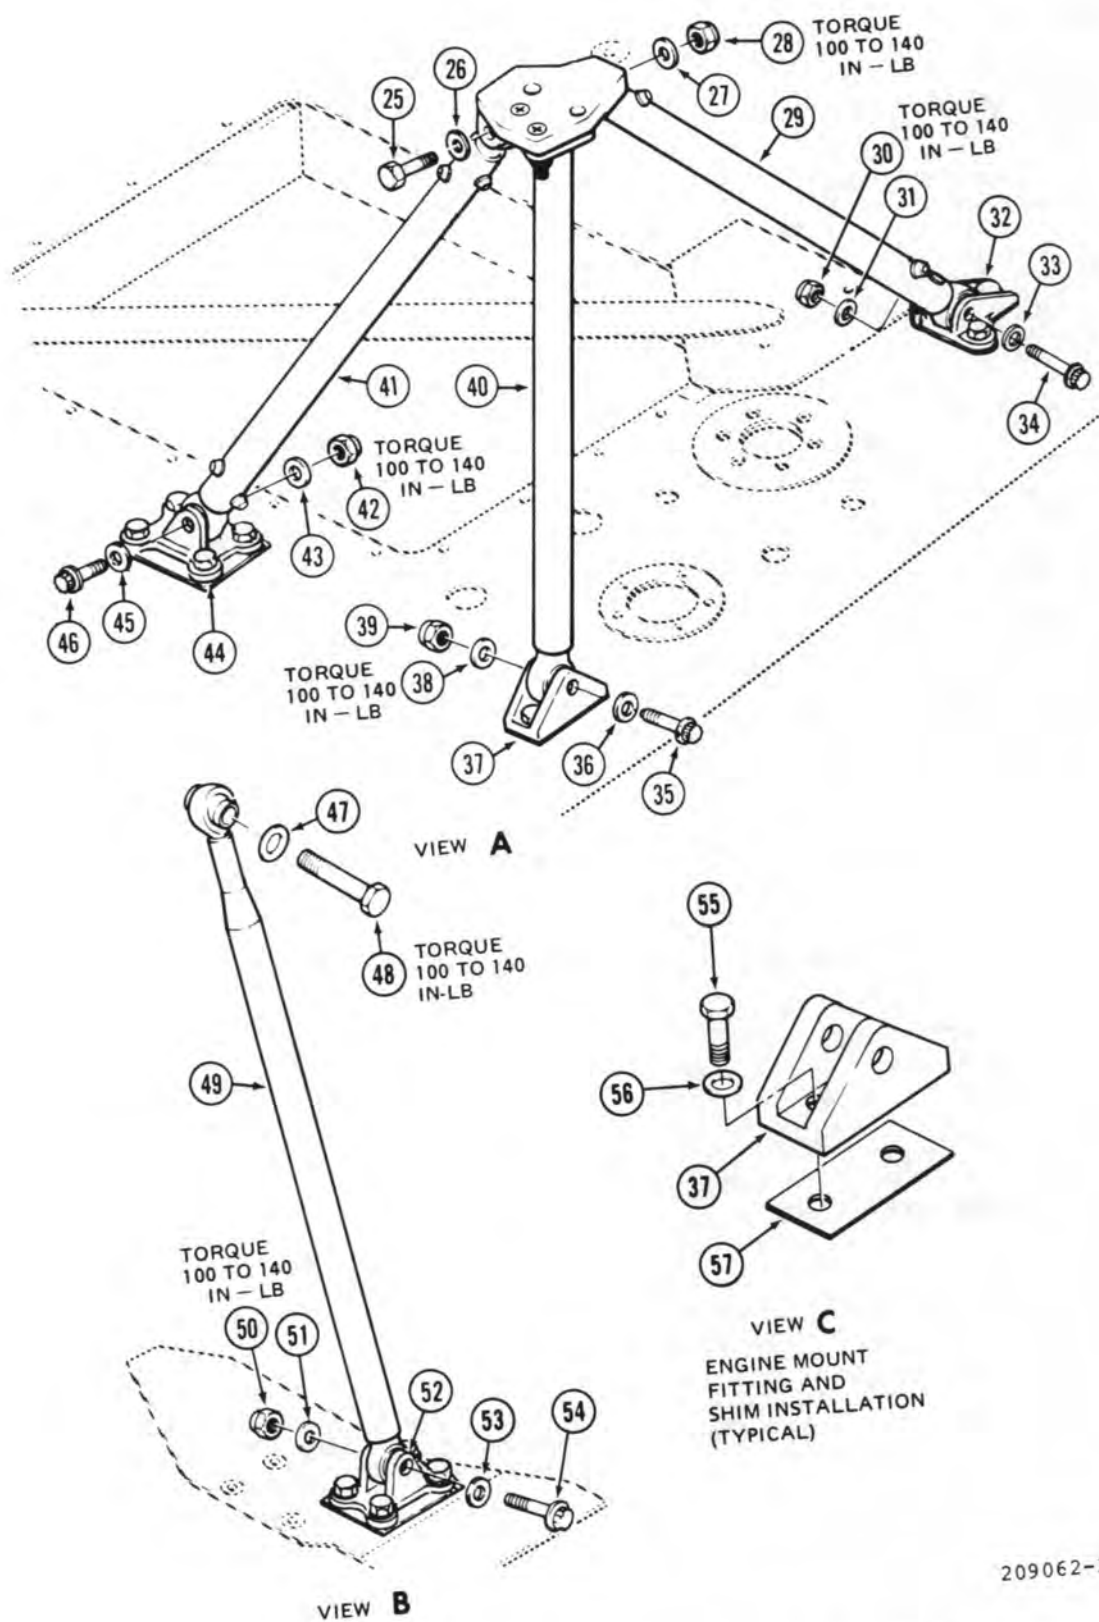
Engine Mount Installation (Sheet 2 of 3)
